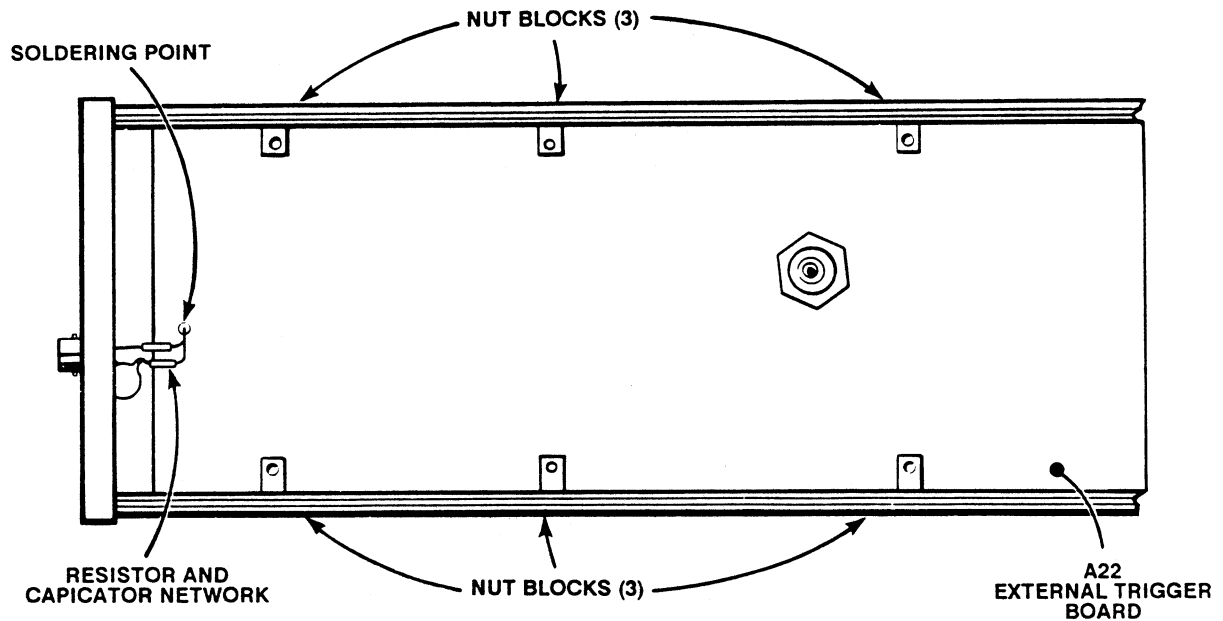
Removing and Replacing the A22 External Trigger Board
